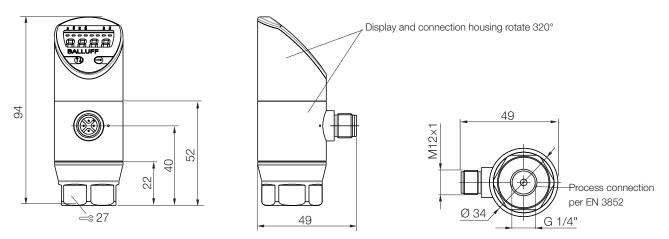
Dimensioned drawing of standard and high-end pressure sensors, not flush-mounted
